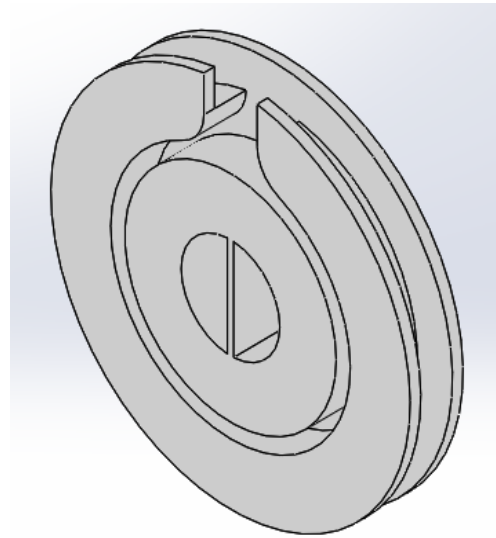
The spool used to store extra exotendon length while preloading the spring.
